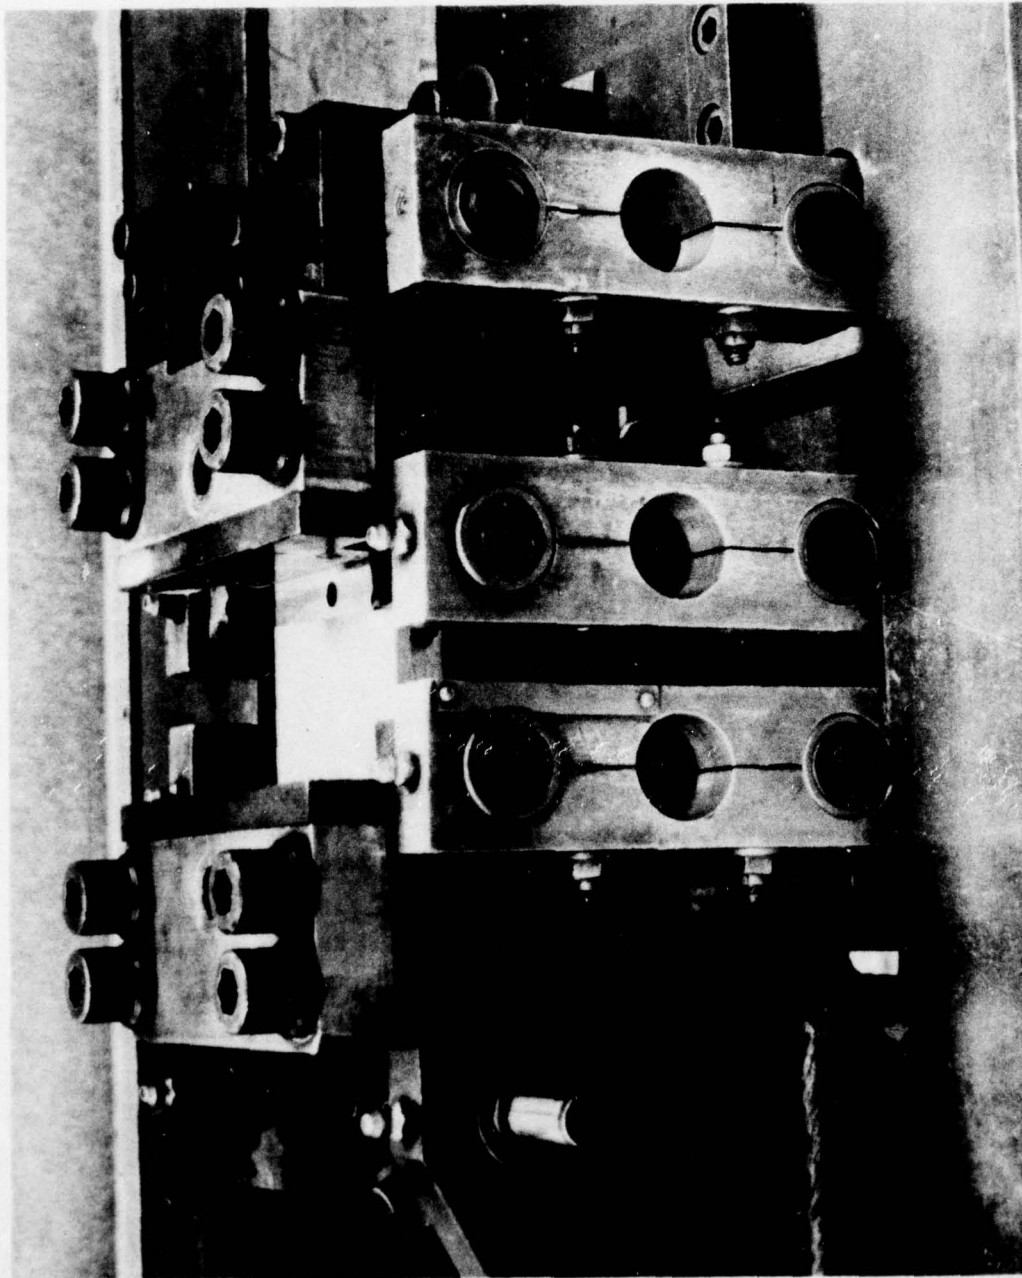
PRECRACKING FIXTURE LOADED WITH SPECIMEN
